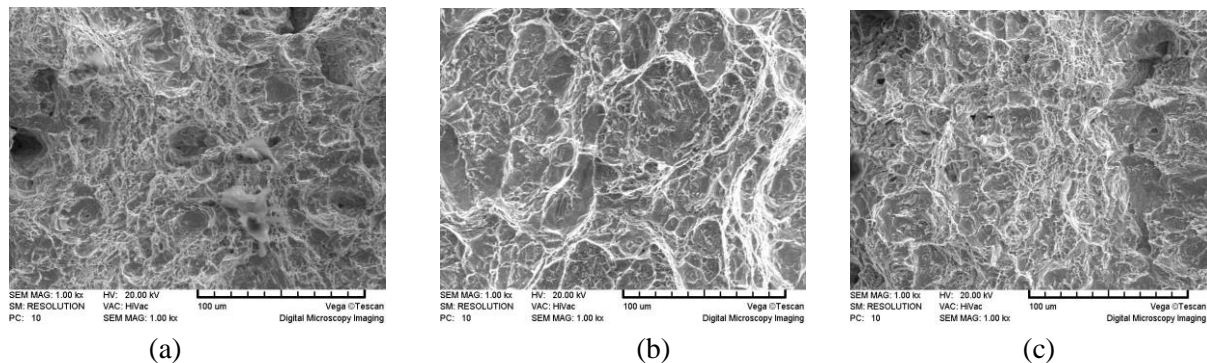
The rupture appearance of aged for 3000h: (a) the welding zone, (b) the heat affected zone, (c) the base metal
